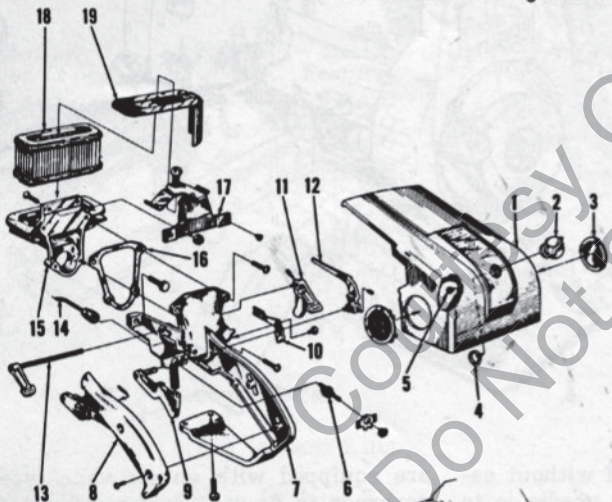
Exploded view of throttle handle, air inlet filter, throttle linkage and cover for models 995D and 995G. Refer to Fig. HL208 for fuel pick-up, carburetor and reed valve installation.
